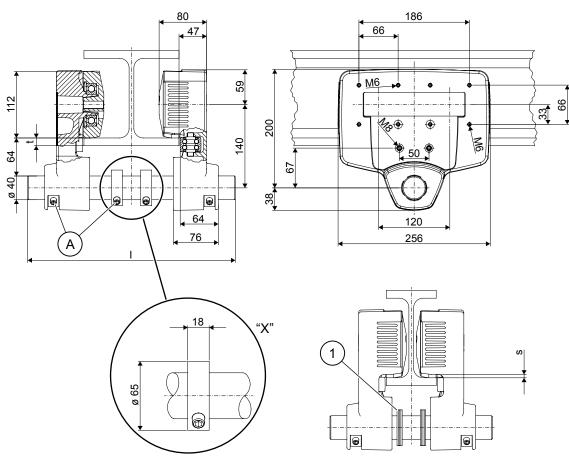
U22 and U34 trolleys for girders to DIN 1025, part 1–5
